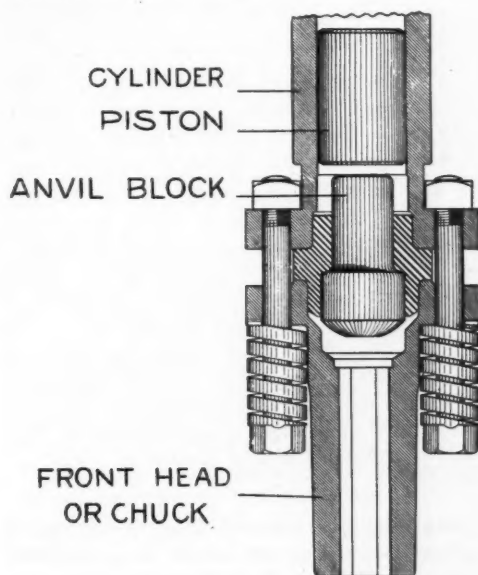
FRONT HEAD OF "BUTTERFLY" HEAD HAMMER DRILL.
